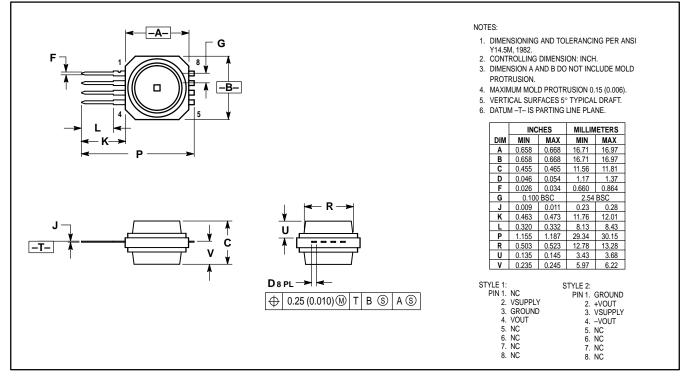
Dual Piston Fit Package with Straight 4–Lead, Lead Form
